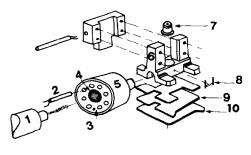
Exploded view of the LC-MS interface 1 = DLI probe end (Vespel) with 2-µm nickel diaphragm, 2 = cartridge heater, 3 = copper heater housing, 4 = copper desolvation chamber, 5 = Macor insulator, 6 = ion source block, 7 = repeller assembly, 8 = rhenium filament; 9 = focusing lens, 10 = ion energy lens
